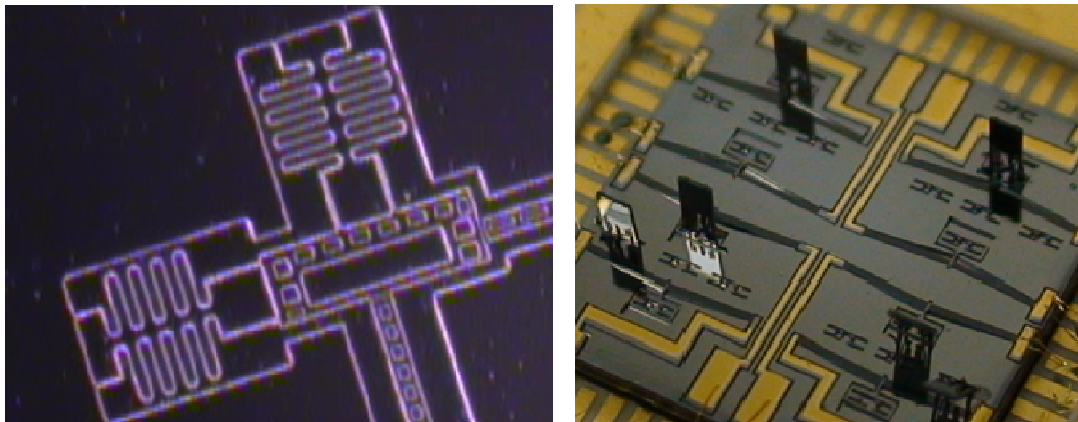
Microrobot Joints. Left- Flexure joints, Right-Assembled joints.
